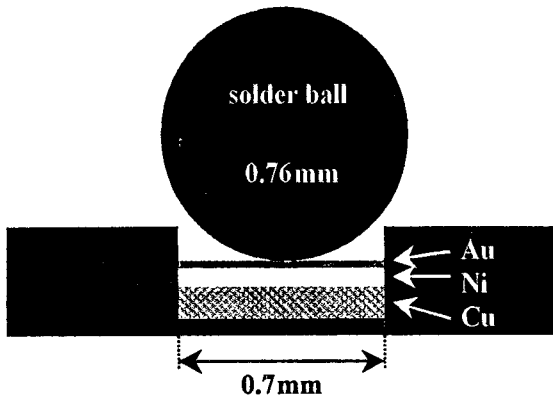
Shape and dimension of BGA substrate and solder ball for the experiment.
